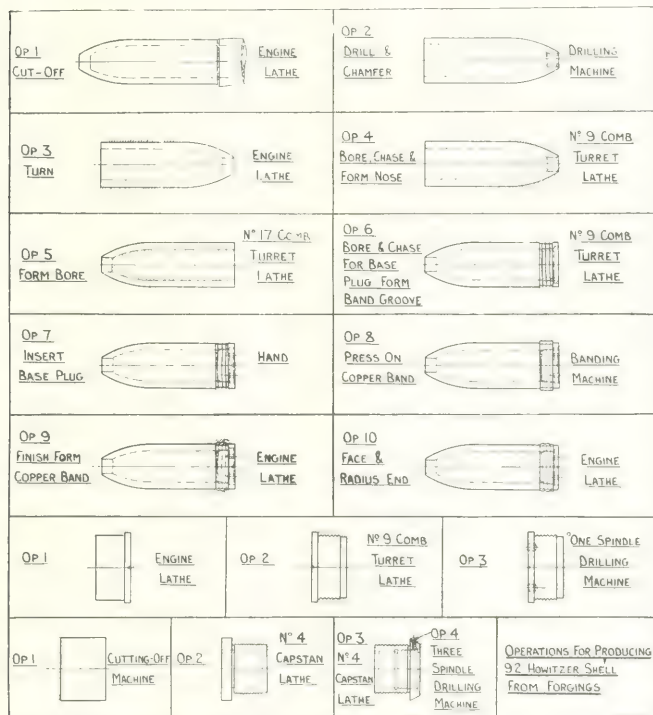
SHOWING SEQUENCE OF MACHINING OPERATIONS ON 9.2 IN. MARK II L. HIGH EXPLOSIVE HOWITZER SHELL. BODIES, BASES AND NOSE BUSHES. THE HATCHED PORTIONS SHOW WHERE MACHINED AT EACH OPERATION.
